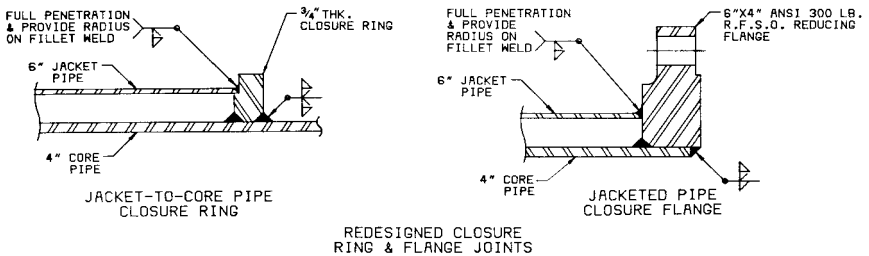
Example of a termination closure ring for metallic systems that has an insert style secondary containment pipe attachment, and that extends beyond the secondary containment. Note the counter bevel weld details for the primary pipe attachment, and the thicker ring portion together adds strength and resistance to cyclic loads of a differential thermal expansion nature. (Source: "Failure Assessment and Redesign of a Jacketed Piping System, a Practical Approach," by W. E. Short II, *Pressure Vessels and Piping Conference*, 1988, ASME, PVP Vol. 139, #H00423.)
